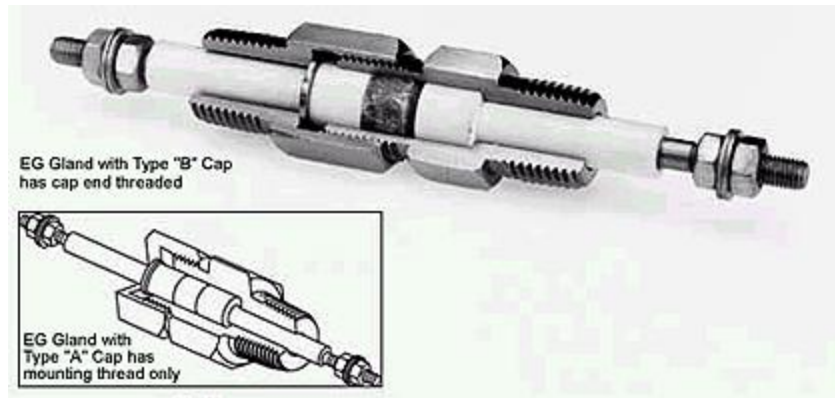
Electrical Pass-Through Fitting for Combustion Bomb [31]
